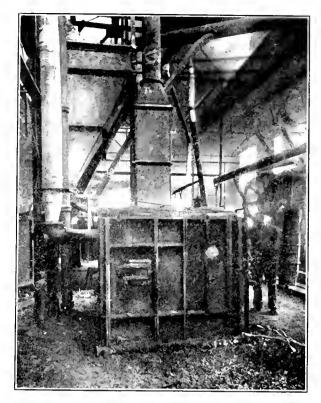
Furnace Heating Blanks for Drop Forging on which Tests were Run
